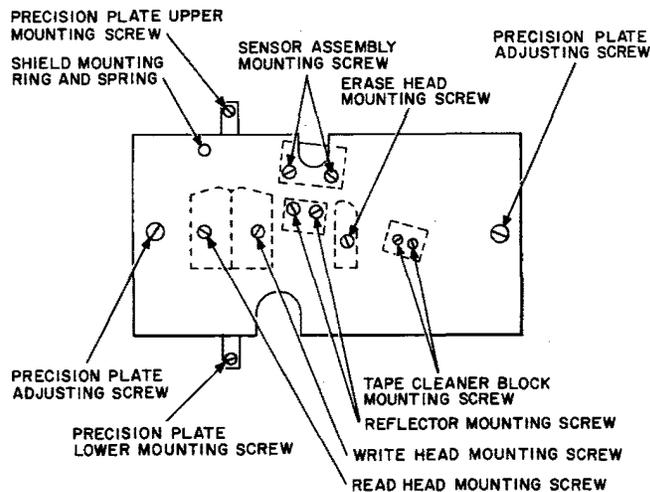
Precision Plate Assembly (L1 and L2 Recorders)—Rear View Showing Component Mounting Screws
